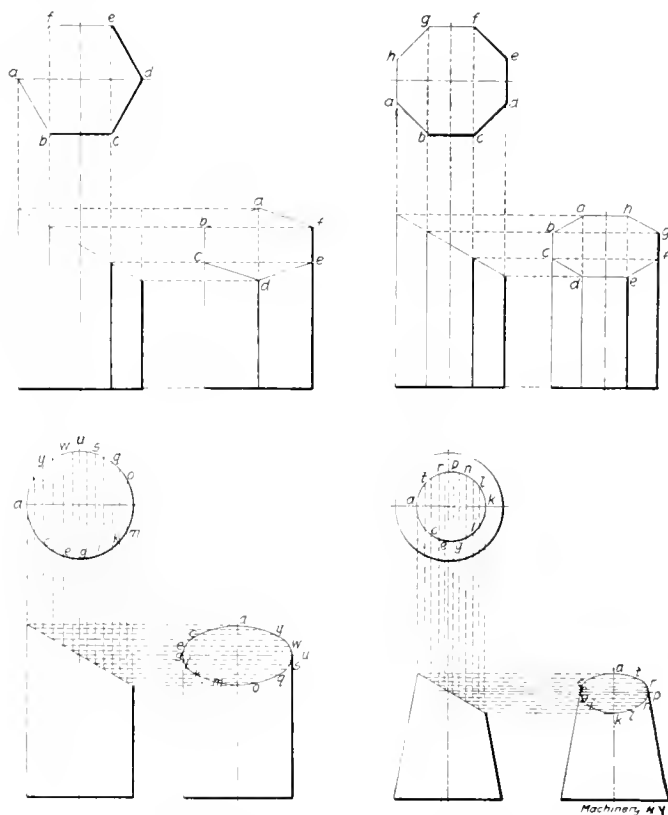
The Blocks shown in Fig. 3 taken apart and used to teach the Projection of Angular Surfaces
